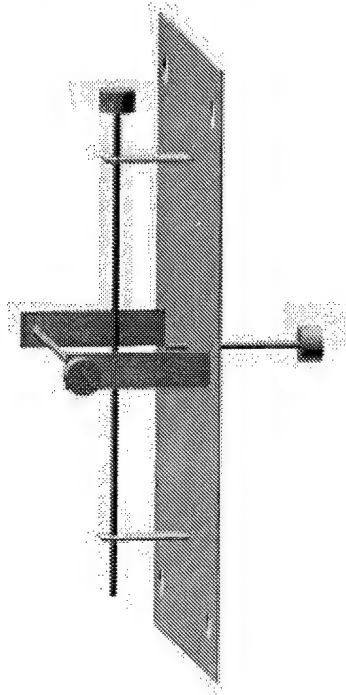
Counterweight Fine-Tuning Balance Mechanism - Side view
